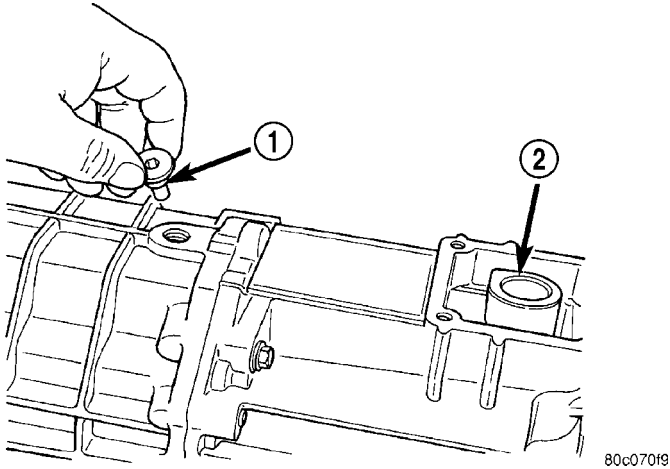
SHIFT SHAFT BUSHING LOCK BOLT
